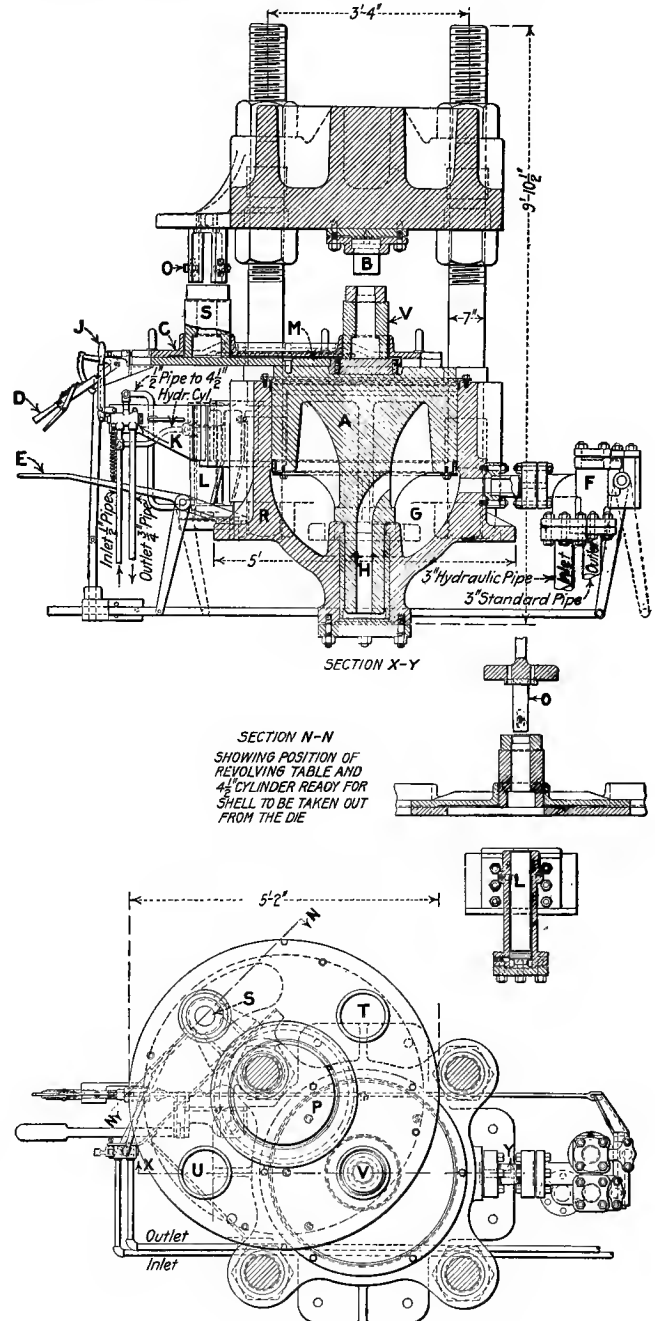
SECTIONS AND PLAN OF FOUR-STATION 800-TON HEADING PRESS
